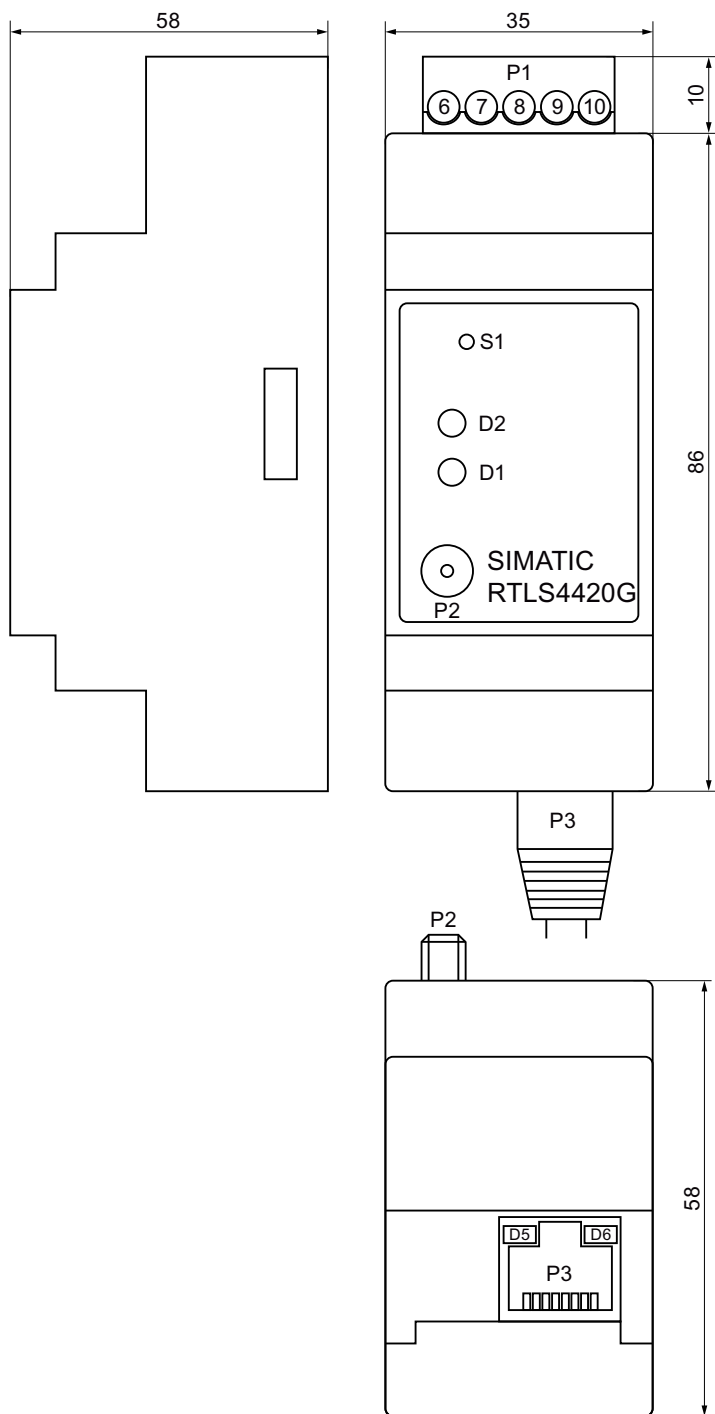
Dimension drawing SIMATIC RTLS4420G - All dimensions specified in millimeters
